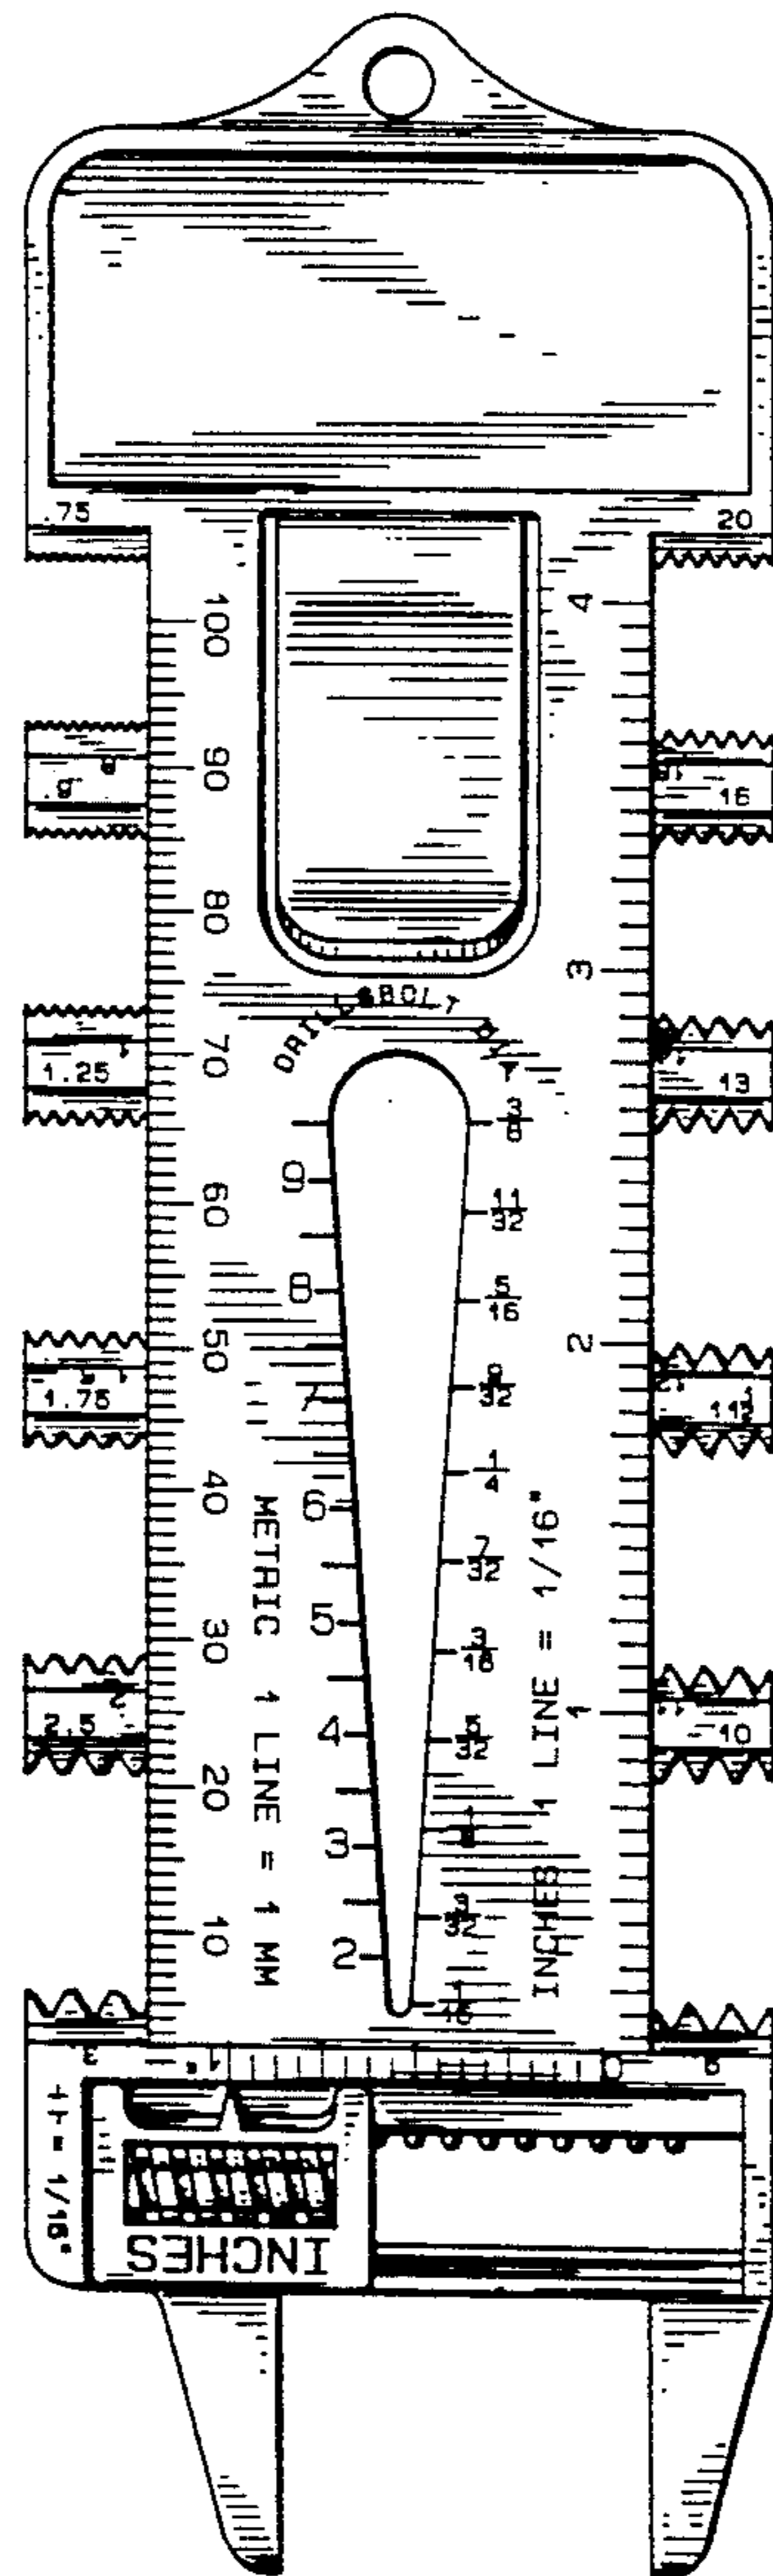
is a front elevational view of my new design for a universal gauging tool;
